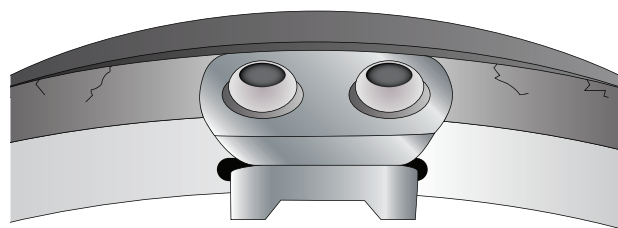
Inspection for cracks in the wheel disc drive key area is performed with dye penetrant on many wheels.
